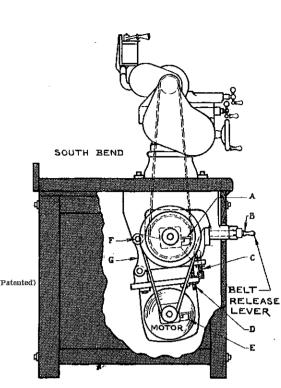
Cross Section End View of Underneath Belt Motor Driven Bench Lathe.
